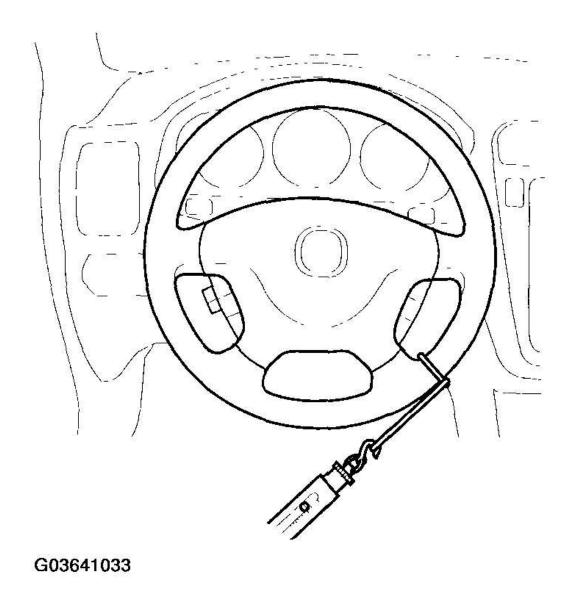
Attaching Spring Scale To Steering Wheel Courtesy of AMERICAN HONDA MOTOR CO., INC.
